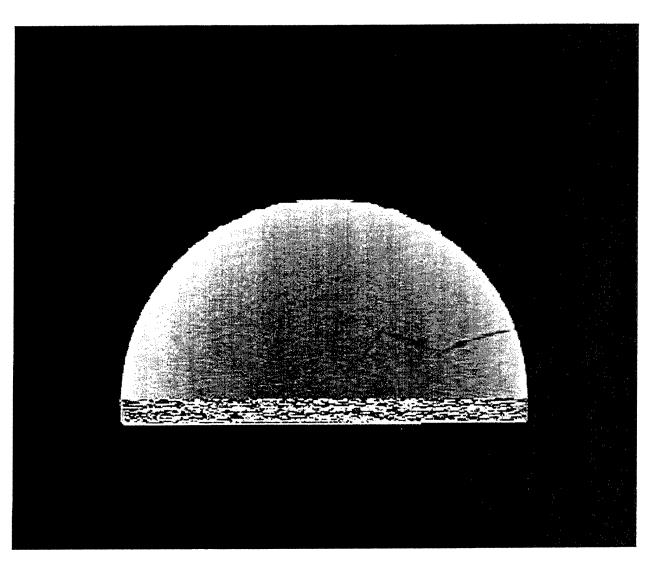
9.68 mm from bottom of disk with 65° rotation about X-axis.
